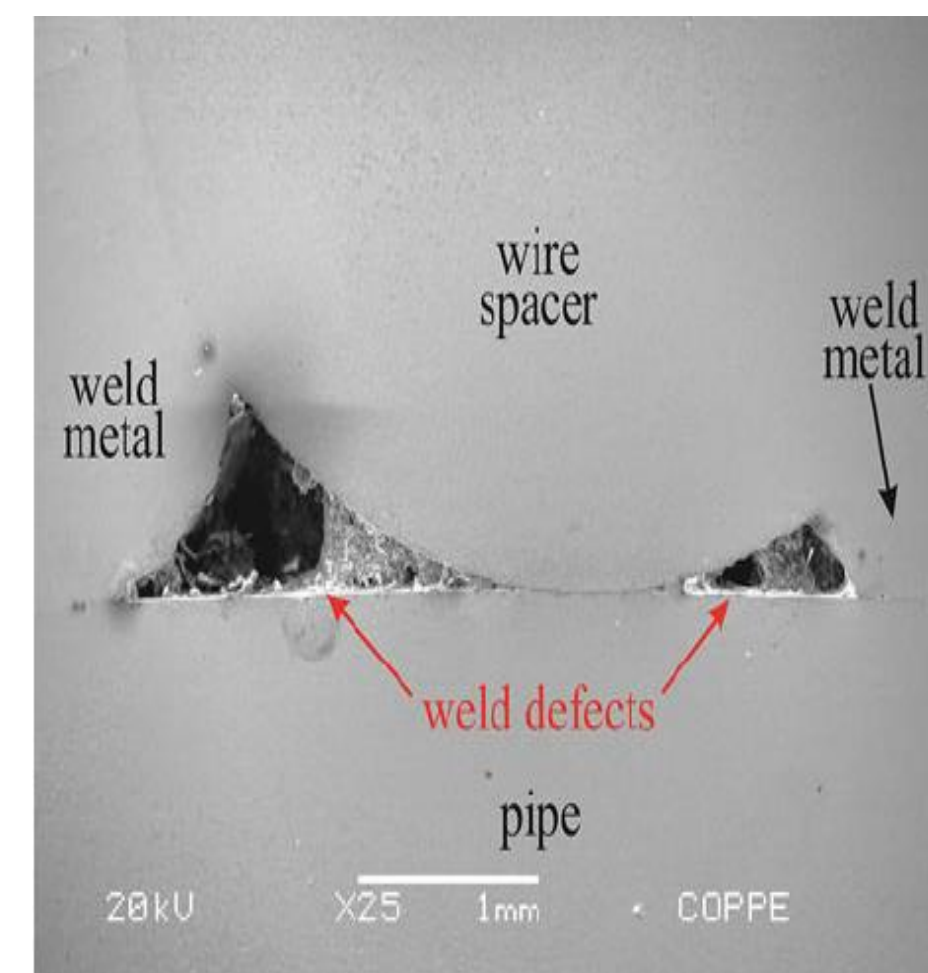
Weld metal and pipe interface (transverse view), showing lack of fusion [4].
